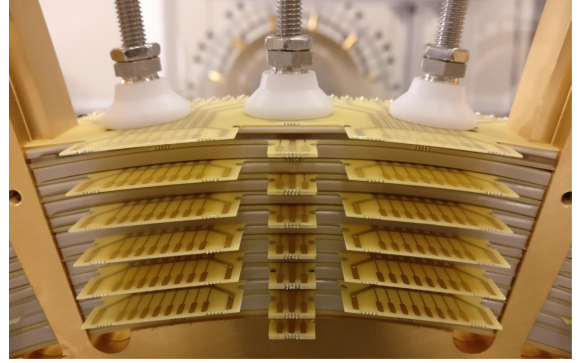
Picture of end-plate with PCB and spacer during wiring each layer by using fixing tool shown in top of the picture.
